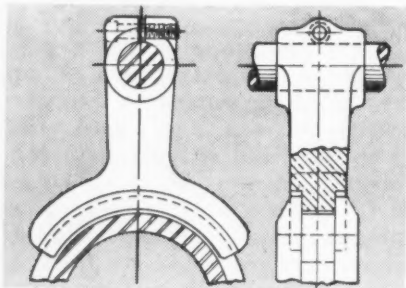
The yoke and shoe in this design are made in one piece which is moved parallel to the shifted member; the fork is cast of bronze.
